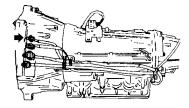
Locating Speedometer Sensor Connector (929) Courtesy of Mazda Motors Corp.
